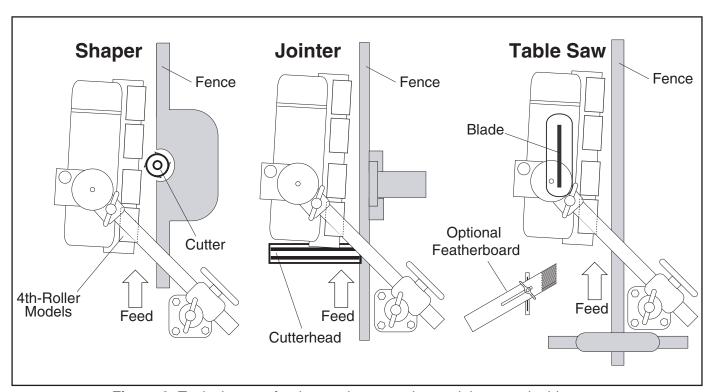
Typical power feed mounting on a shaper, jointer, and table saw.
